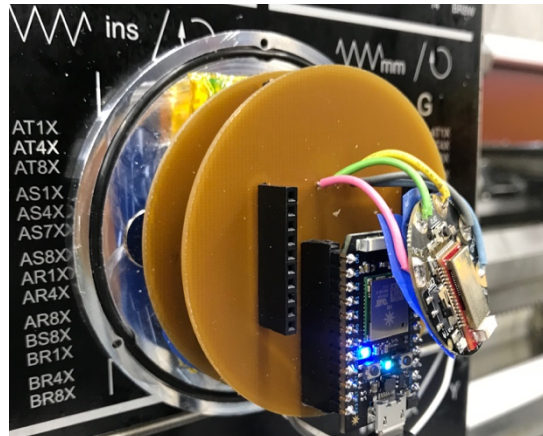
WASP mounted to the front gear panel of a Harrison manual lathe for vibration measurement.
